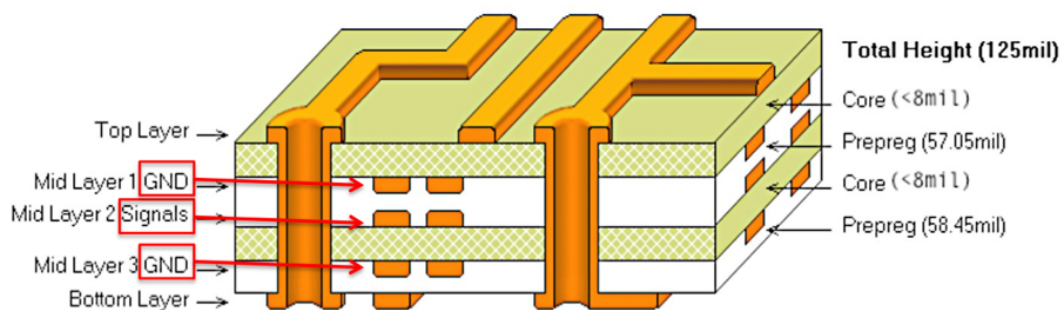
Layout of the board-layers inside the PCB, with specific thicknesses.
